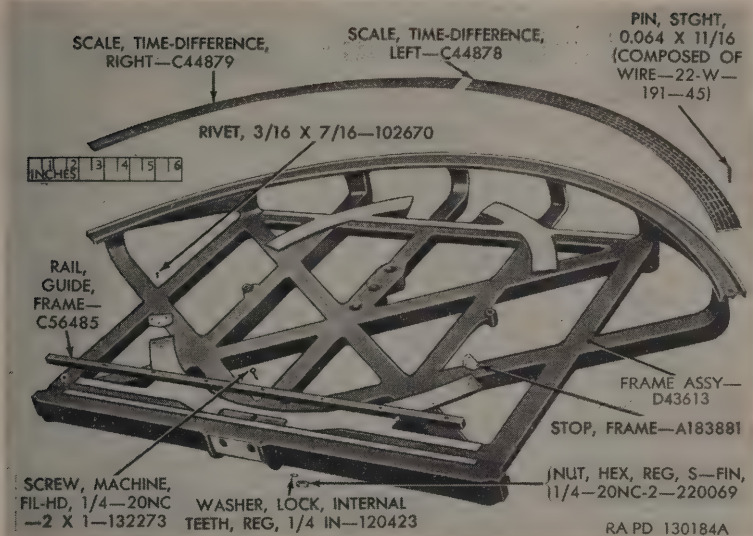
Frame assembly—(exploded view) sound-ranging plotting board M1 or M1A1.
